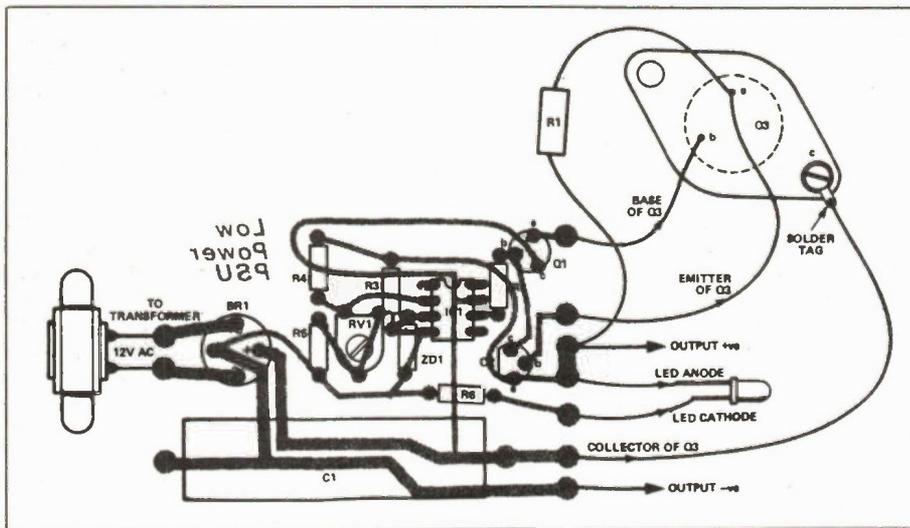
The PCB layout. Note that several components are not mounted on the PCB. Q3 is chassis mounting and case for its mounting bolts. For safety, add a fuse between BR1 and T1.
